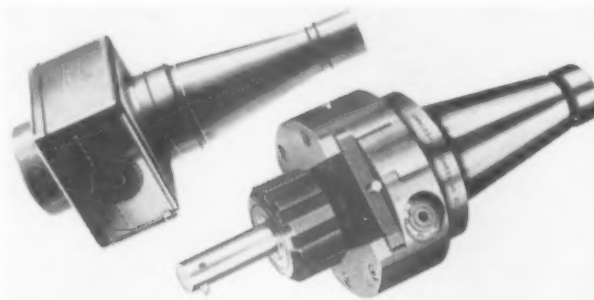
shows two typical commercial adjustable stub boring heads designed for use on production boring or with jig boring machines. The tool at left is by Wendt-Sonis, of Hannibal, Mo., the one at right by Universal Engineering Company, Frankenmuth, Mich. Both have micrometer adjustment.
